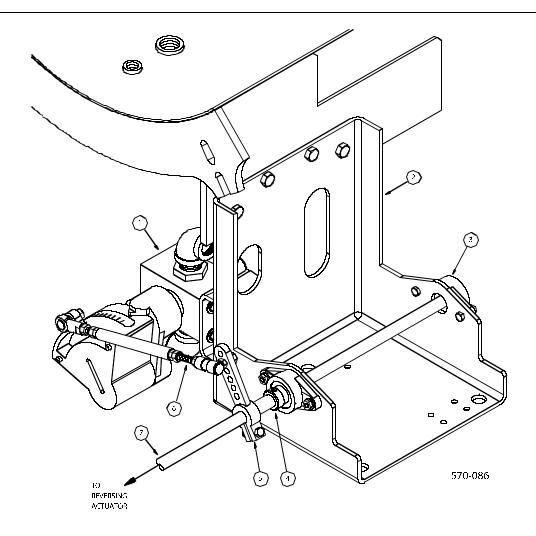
Gas Control Valve for Center Spuds, Cam and Linkages
